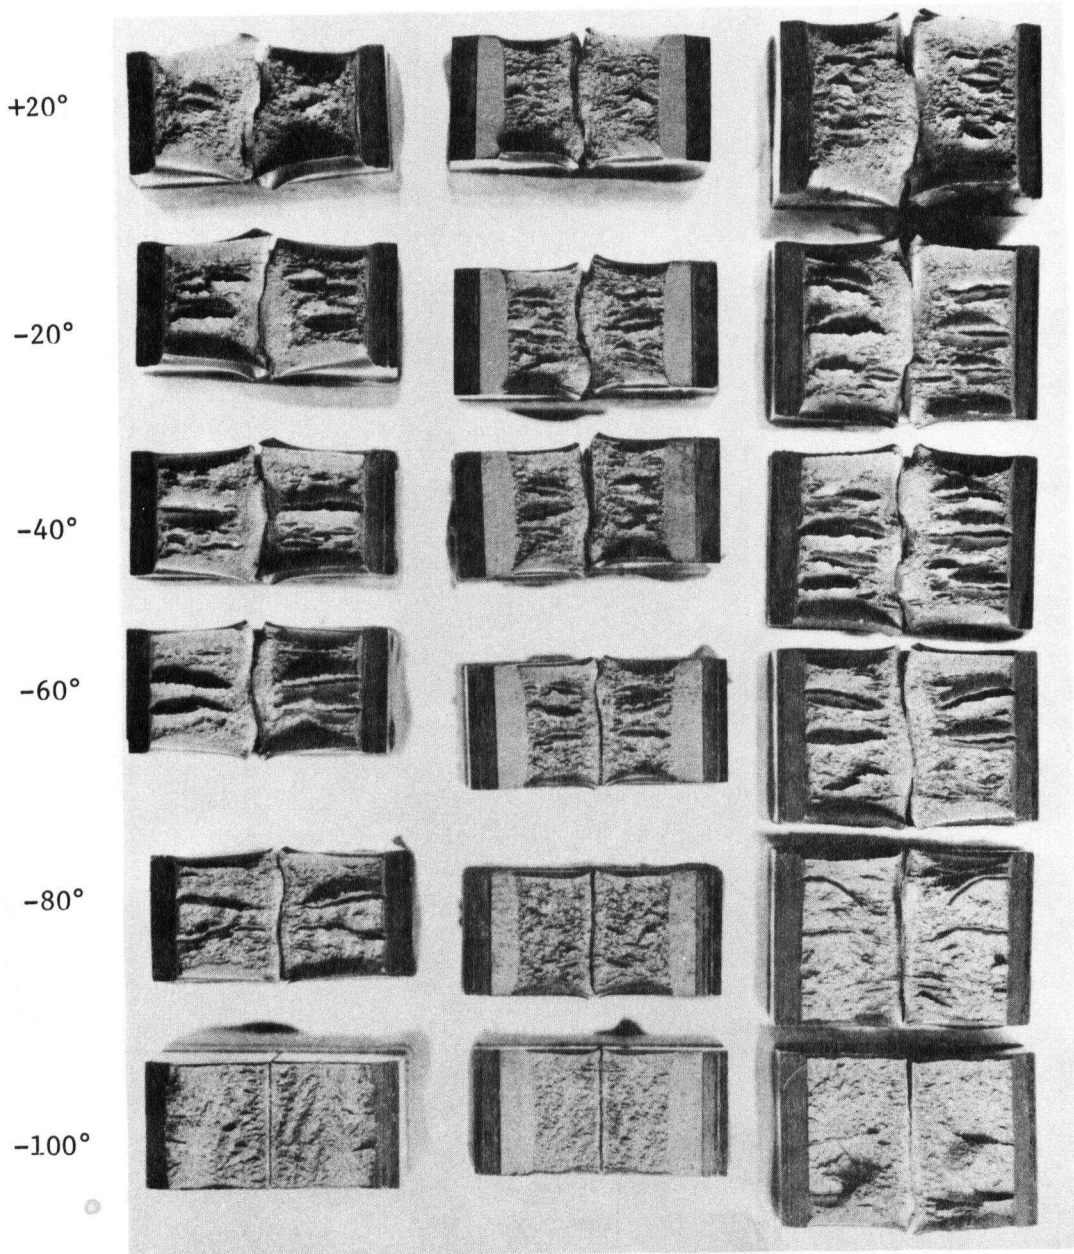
AF-1 steel fracture surfaces, crack transverse to rolling direction.
